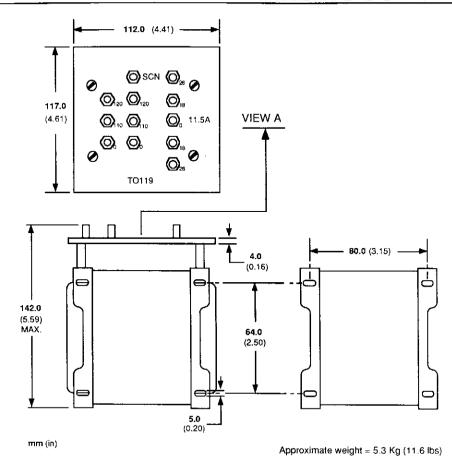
Transformer Model TO119 Dimensions (300VA)
